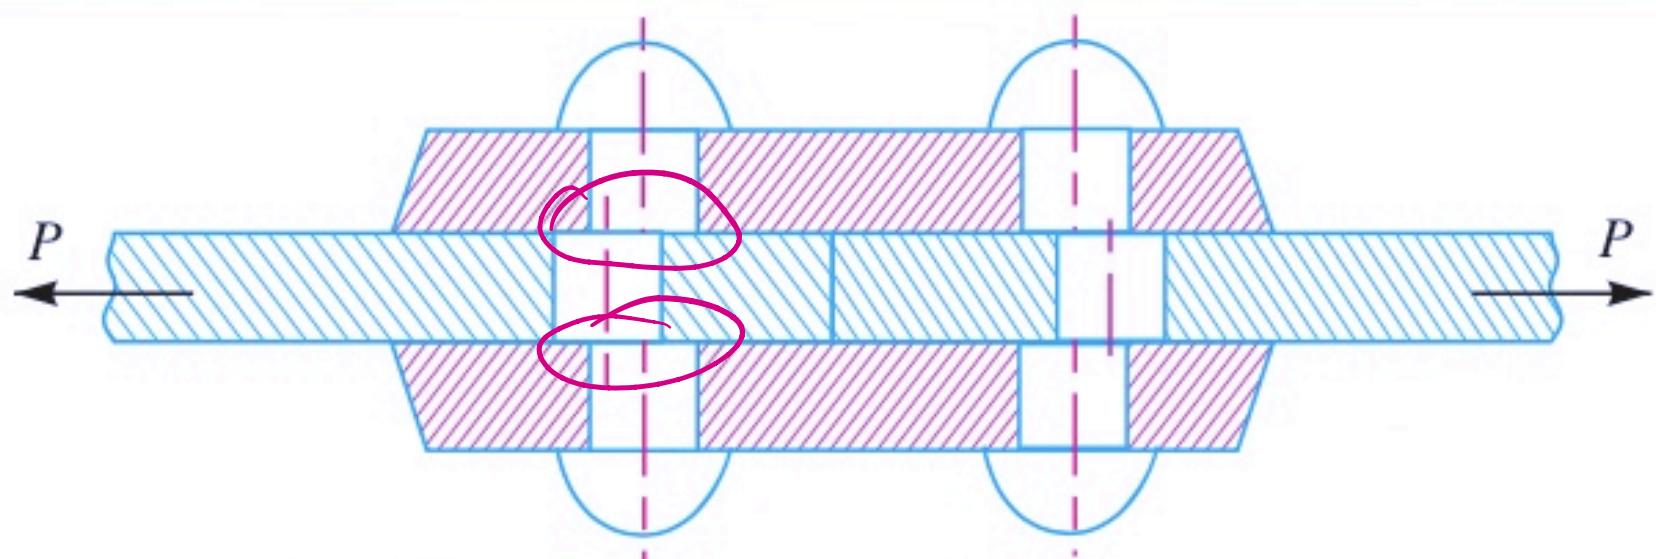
Shearing off a rivet in double cover butt joint.
